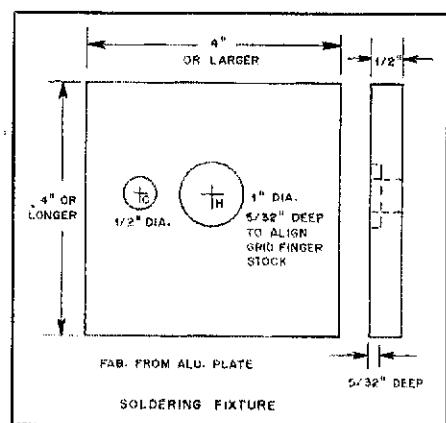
Dimensions of the soldering fixture. See Fig. 2 for more information on hole location.
